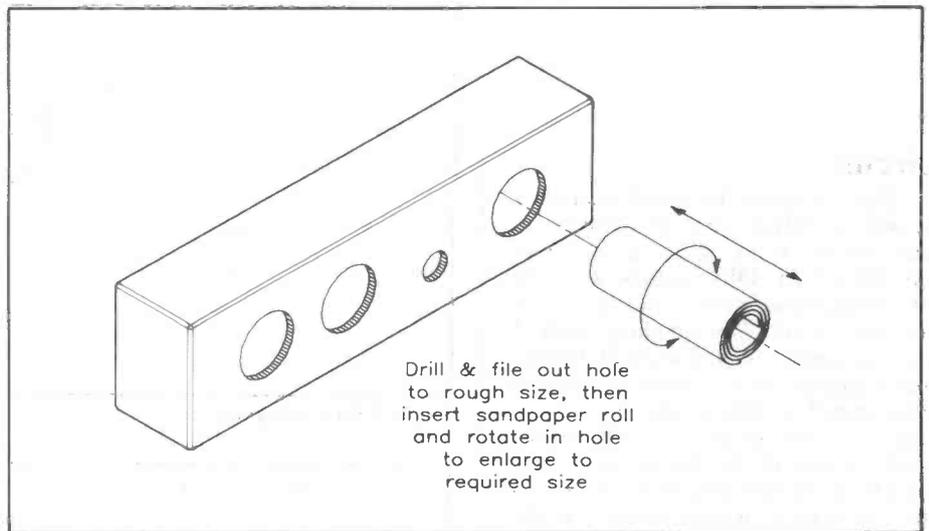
Enlarging the socket holes with a piece of rolled up sandpaper.
